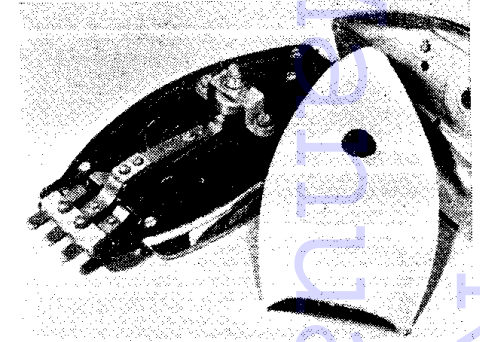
With body and asbestos shield removed, the thermostat is accessible. To replace the element, the switch assembly and the black-dyed steel clamp plate have to be removed
